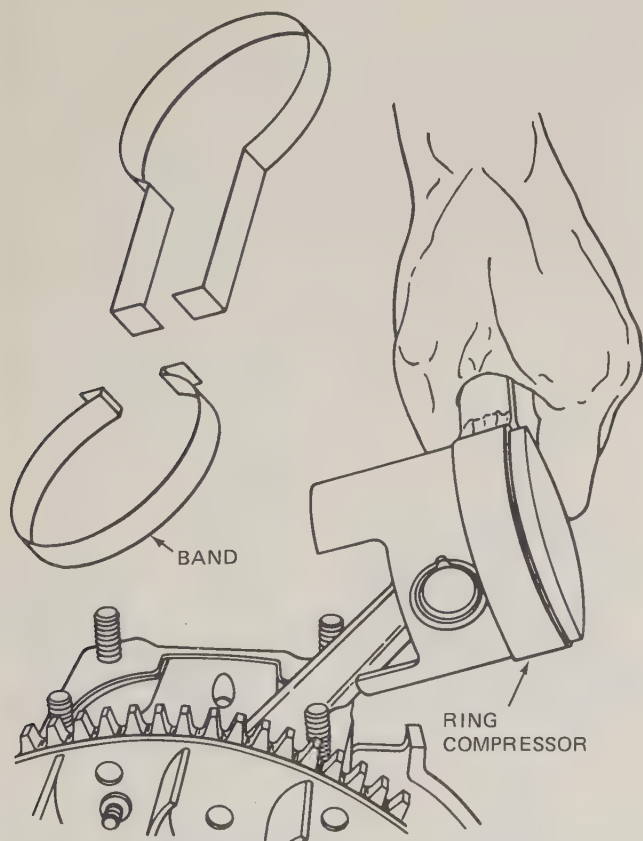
A two-piece band-type ring compressor is used to install the piston on many two-cycle engines. (Kohler Company)
